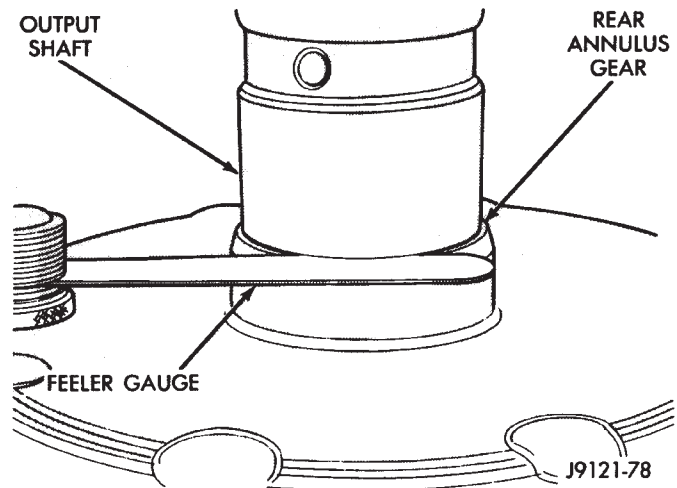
Checking Planetary Geartrain End Play and installation. Remove valves, plugs and springs with a pencil magnet. Do not use pliers to remove any of the valves, plugs or springs and do not force any of the components out or into place. The valves and valve body housings will be damaged if force is used. Tag or mark the valve body springs for reference as they are removed. Do not allow them to become intermixed.
